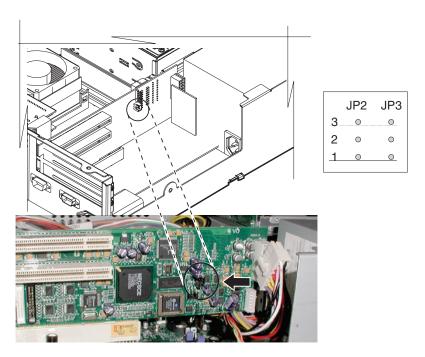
Setting the cash drawer using the jumper override. Tip: Using Adobe Acrobat, you can magnify the digital picture to see a close-up view of the card
